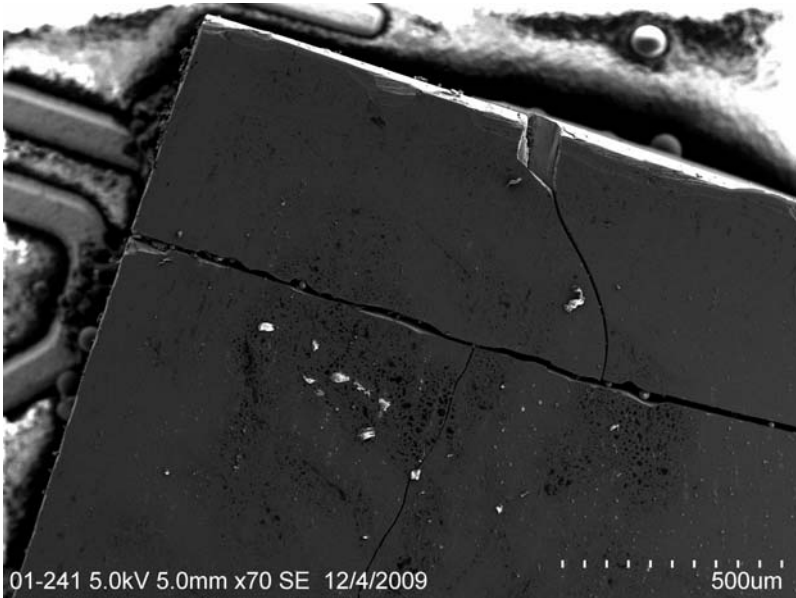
SEM photo of a cracked I-2 test device after firing. Note that the cracked parts of the device are still attached to the PCB.
